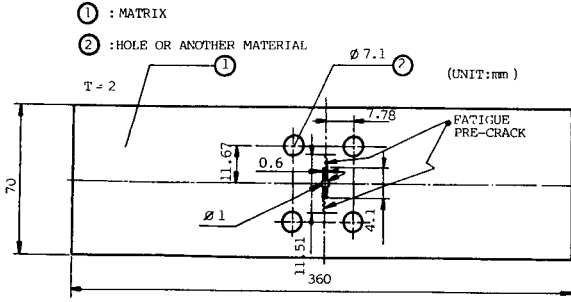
Fatigue test specimen (center cracked panel with holes or holes filled with brazing)
